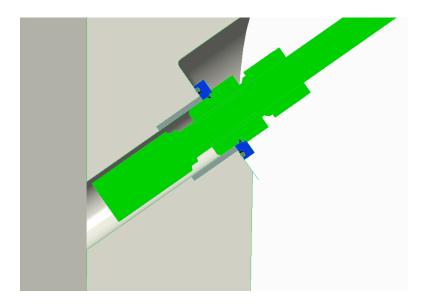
Assembly of transducer probe, Helicoil, washer and compression fitting
